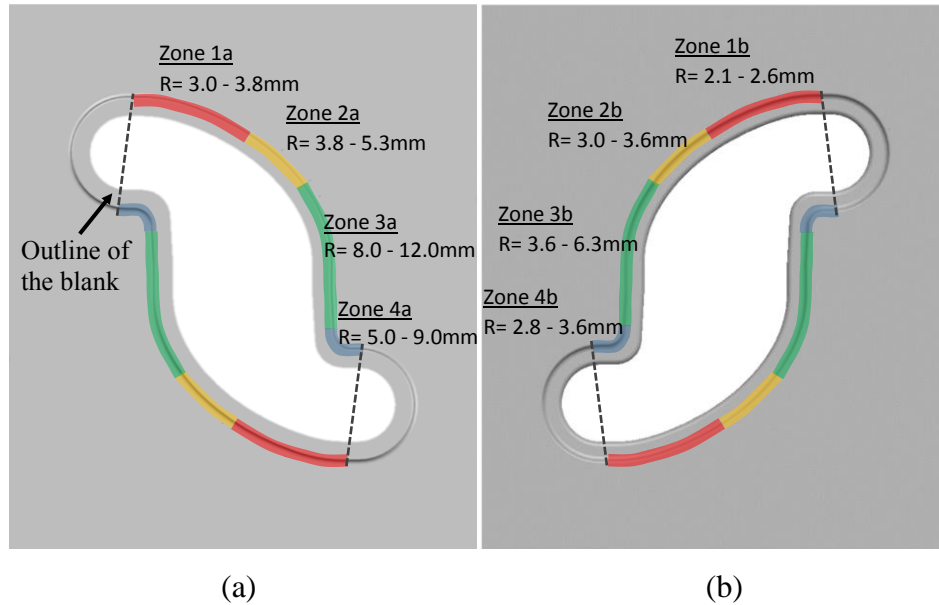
Overview of the rounding radii of the drawbead geometry on (a) the blank holder and (b) the forming die.
